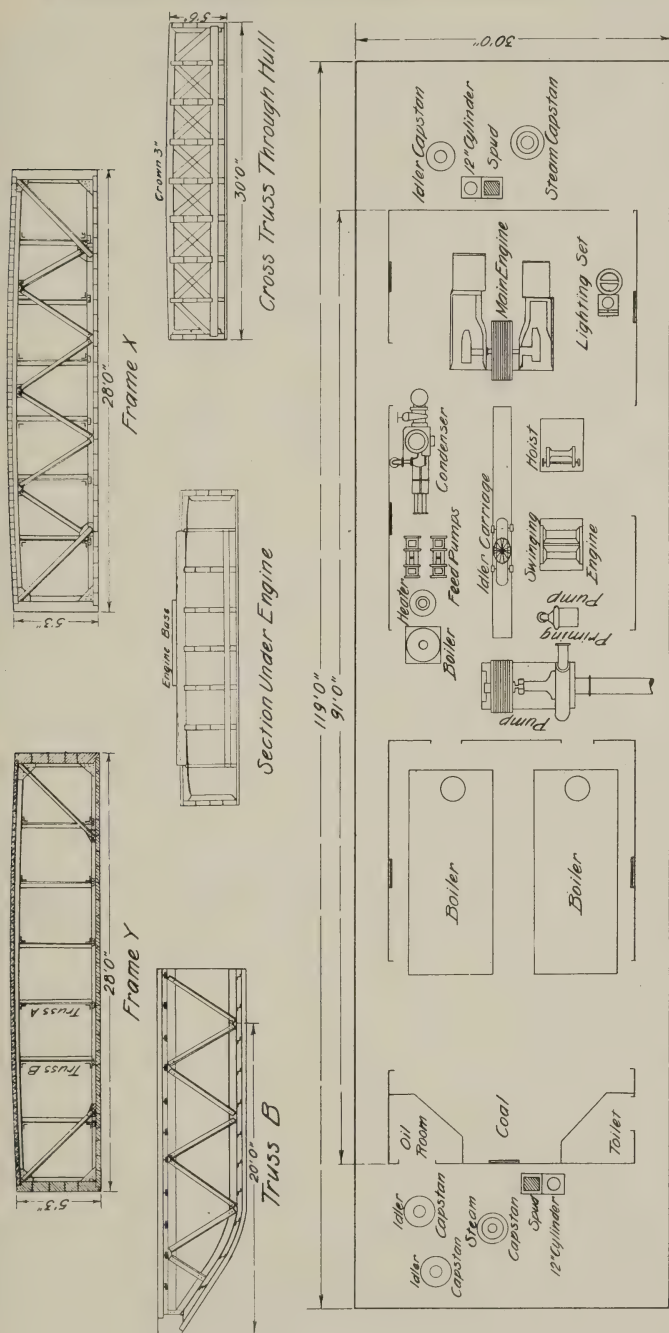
Longitudinal truss B; Frames X and Y pertain to the composite hull of the dredge *Etna*. Remaining plan and sections pertain to the dredge *Peter*.
